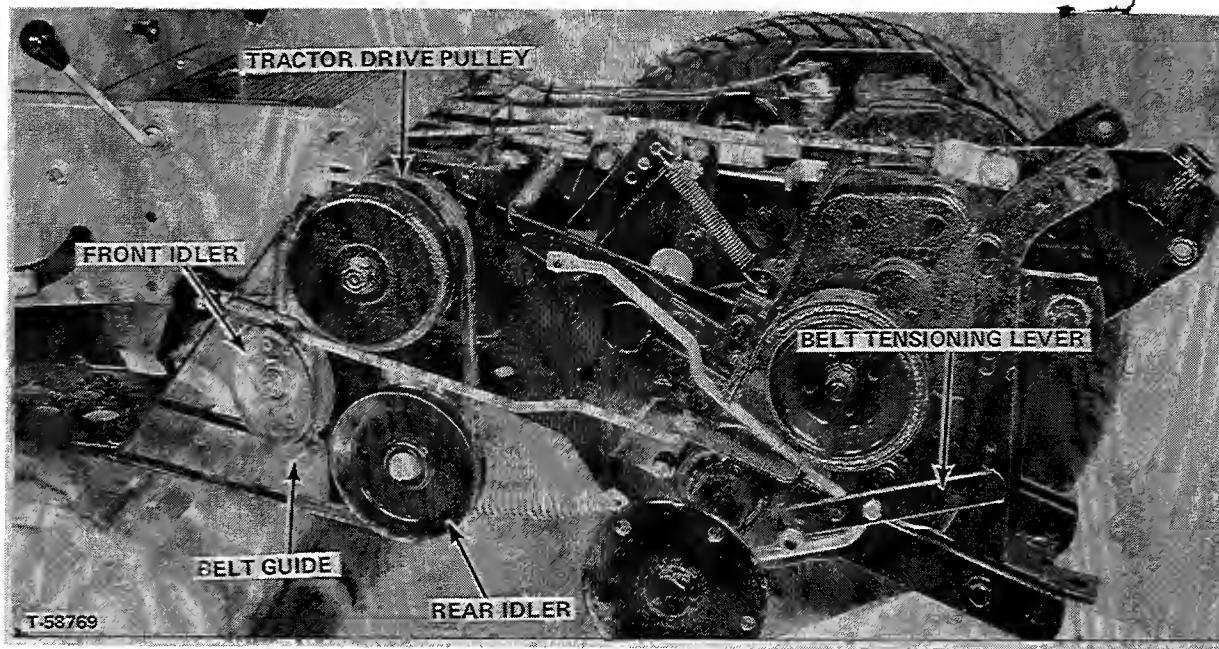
(Seat Deck and L.H. Rear Wheel Removed)
